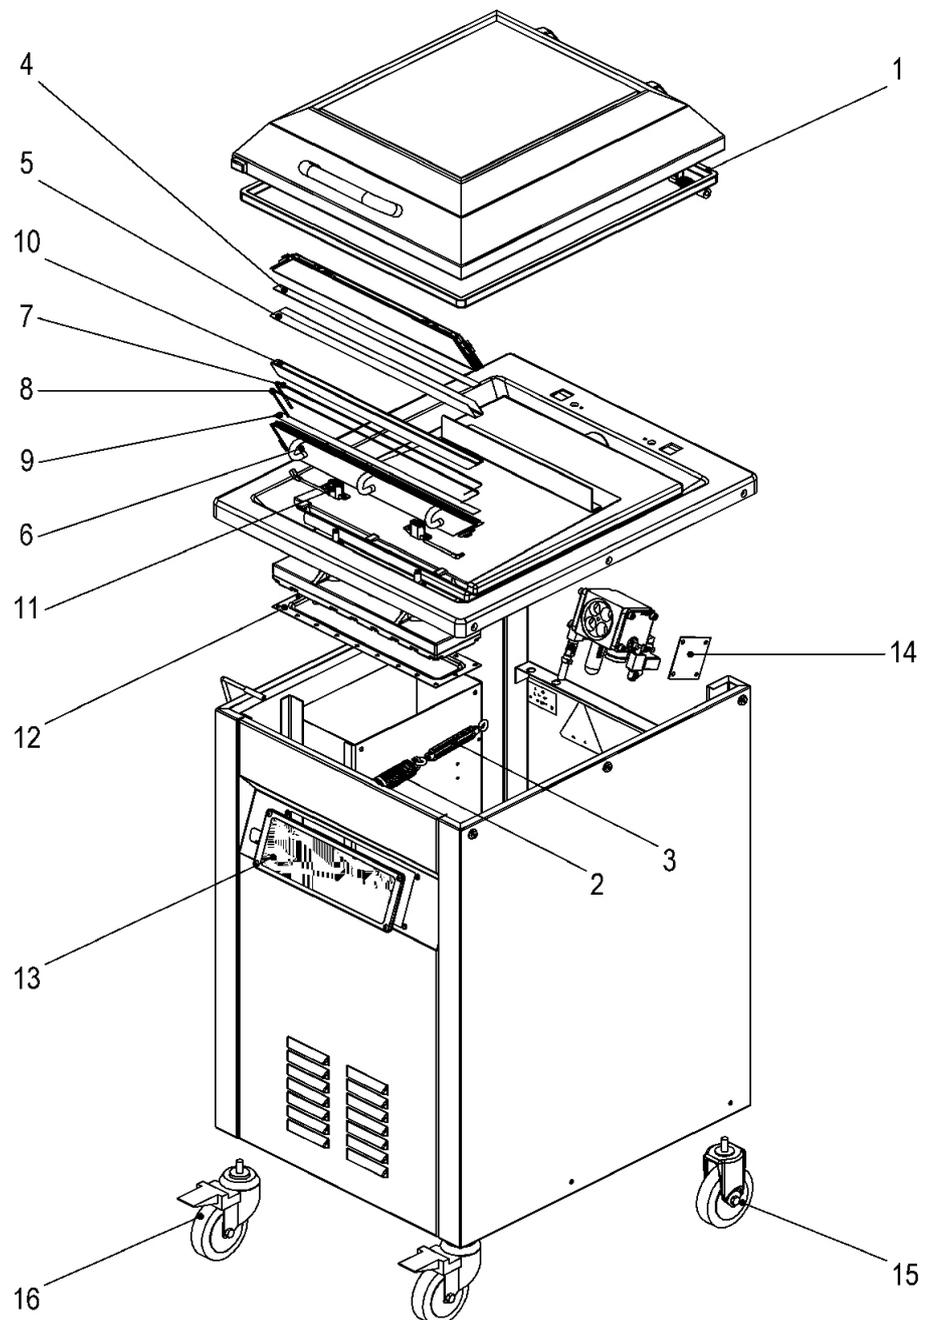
Spare parts drawing (SAP-DIS 16000023384)
